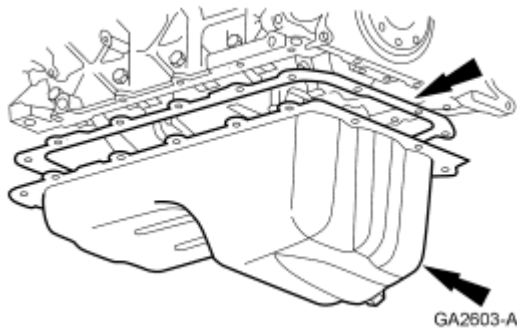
Positioning New Oil Pan Gasket And Oil Pan
